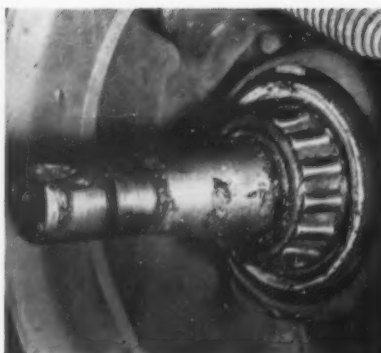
B—Spindle and Inner Bearing of Heavy Duty Truck Front Wheel After 40,000 Miles Using Grease A, B, or C.
